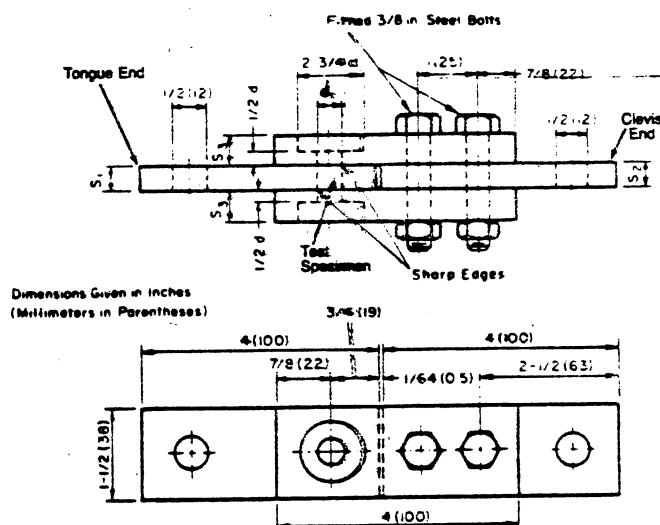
Shear test fixture of the compression loading type used for single or double shear test (Tinius Olsen Testing Machine Company)
